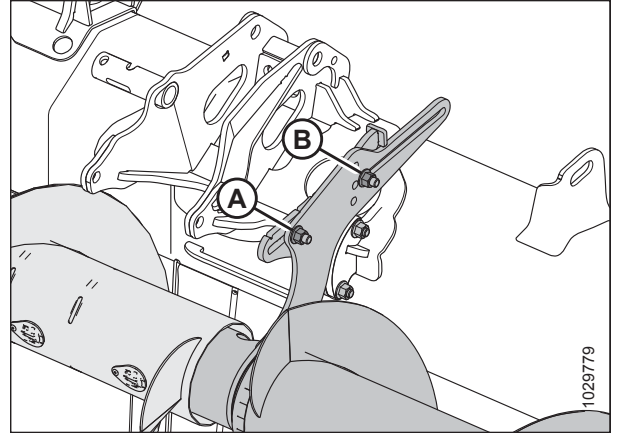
Initial Position of Adjustable Mounts – Two-Piece Auger
